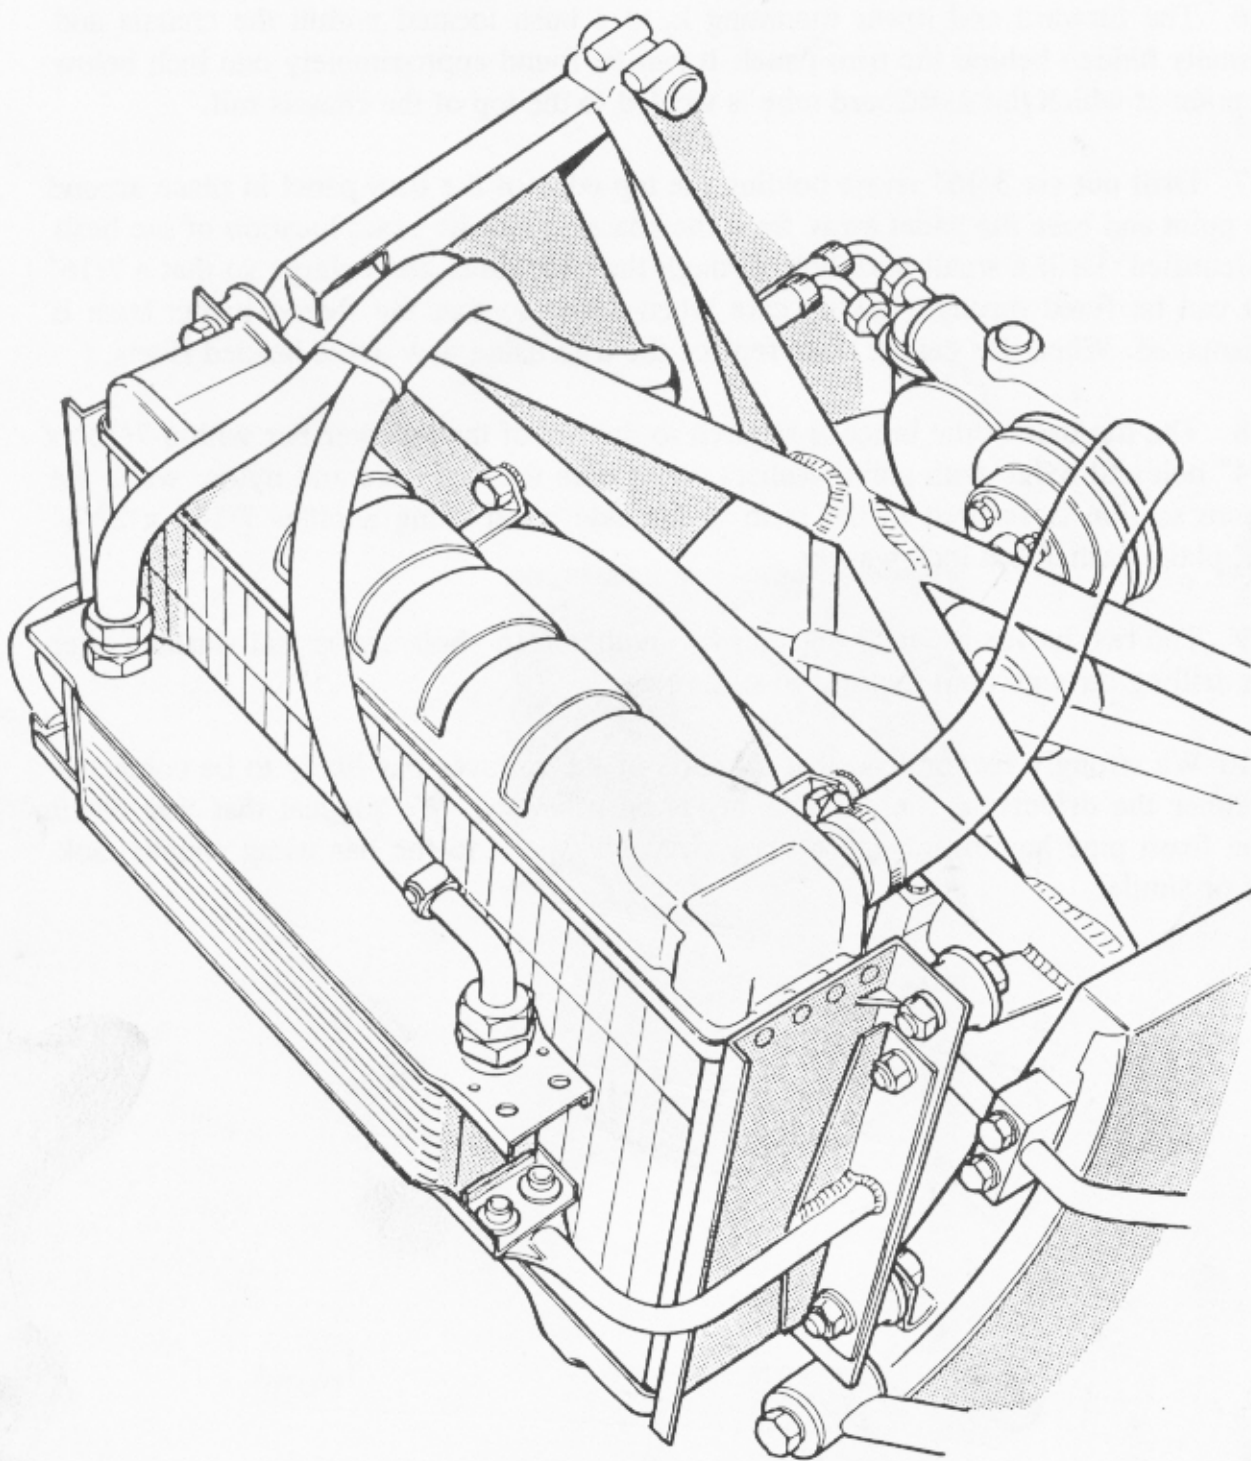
A Oil Cooler Pipes Layout (Front View)
